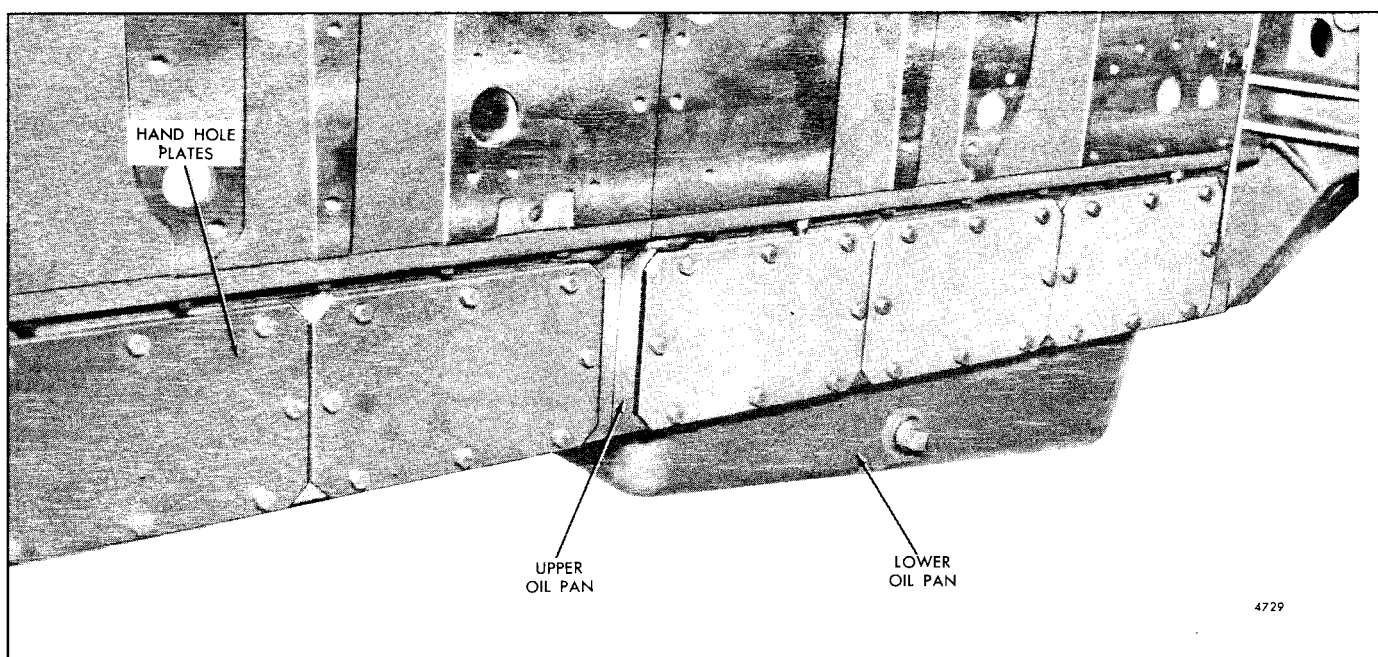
Oil Pan Installed on 12V-149 Engine
